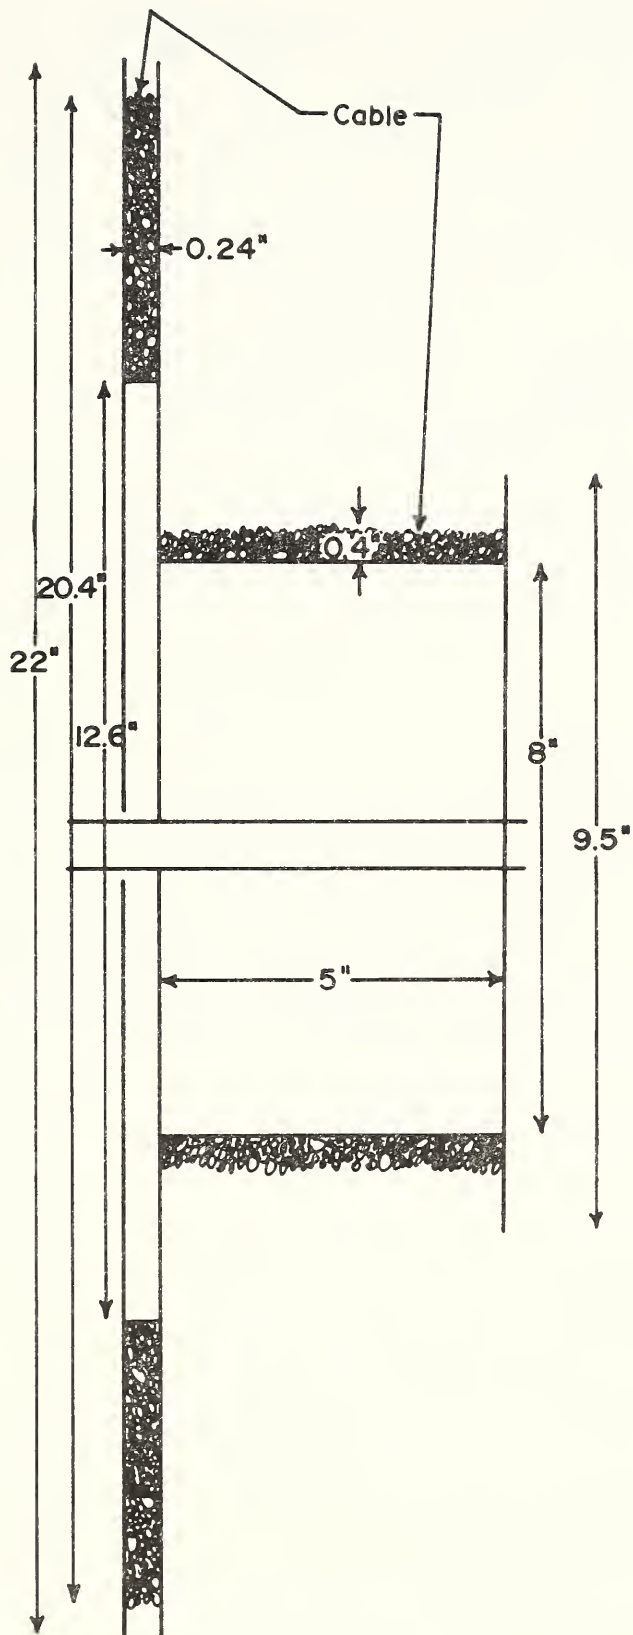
Reel dimensions for consecutive 29- and 14-acre fields (end view).
